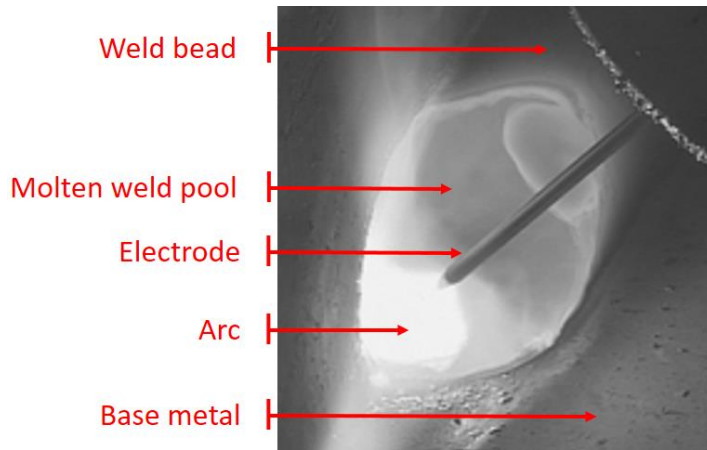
Process arc welding. Adapted from (NIT, 2015)
